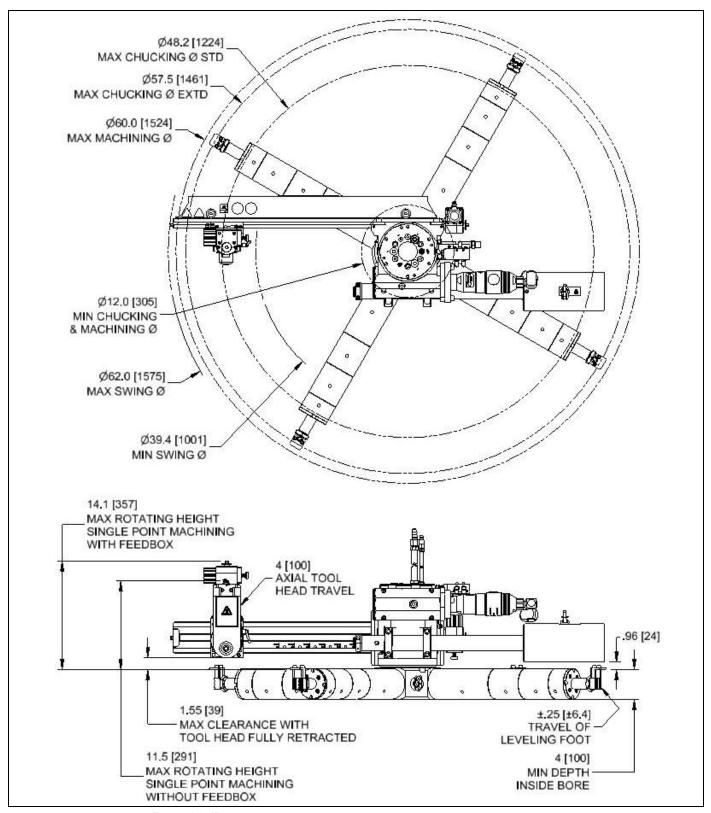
ID CHUCK ASSEMBLY DIMENSIONS
